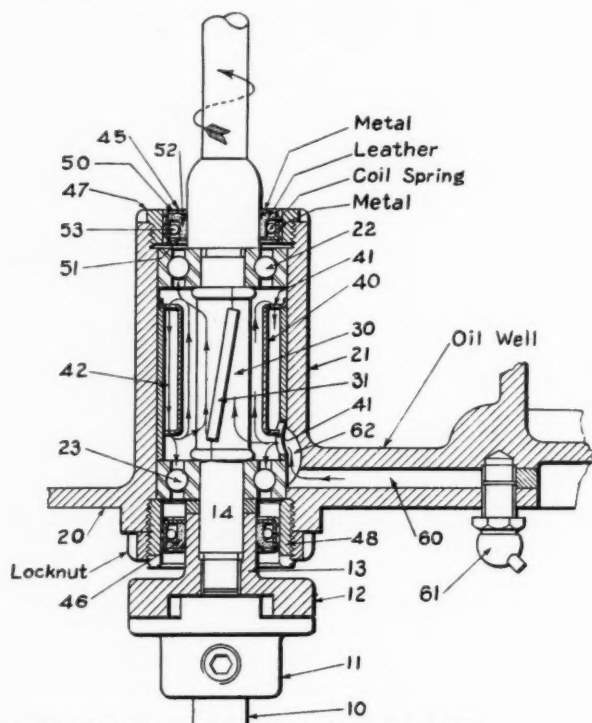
Helically arranged impellers on vertical shaft pump oil to upper bearing surfaces of this assembly
